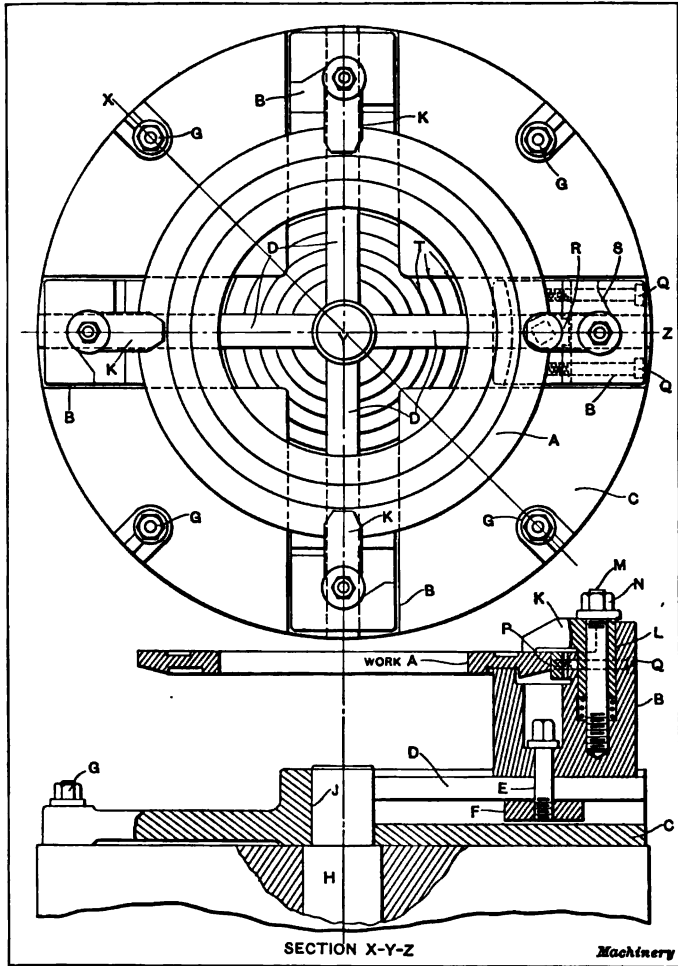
Special Fixture for Holding a Number of Different Sizes of Bevel Gear Blanks on the Boring Mill
